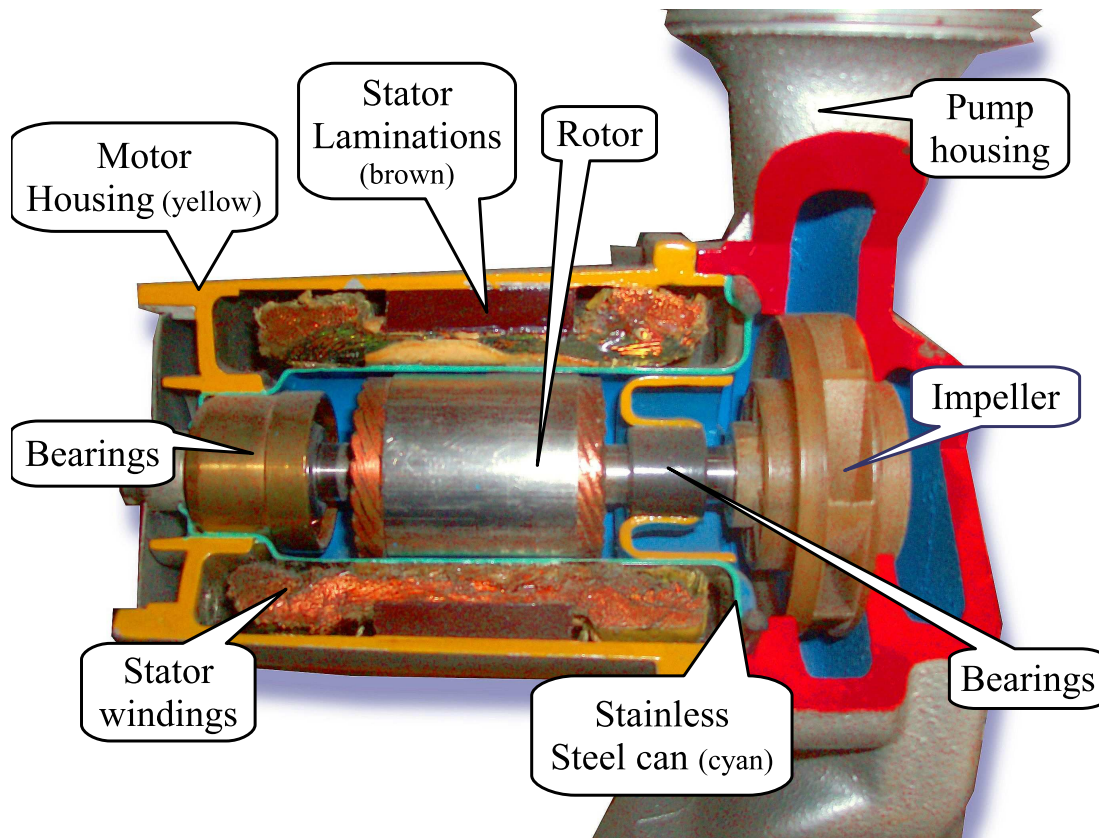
The pump is made of a pump housing, an impeller, a rotor, bearings, a stator (with windings), and control electronics (not shown). The areas marked with blue in the pump and motor are normally flooded with water. The motor shown here is a squirrel cage induction motor.
